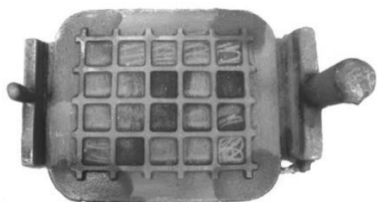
View of an exemplary experimental casting after removing from the sand casting mold
